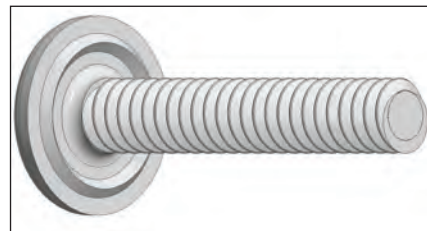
Pictured is a ring projection-style weld fastener.
